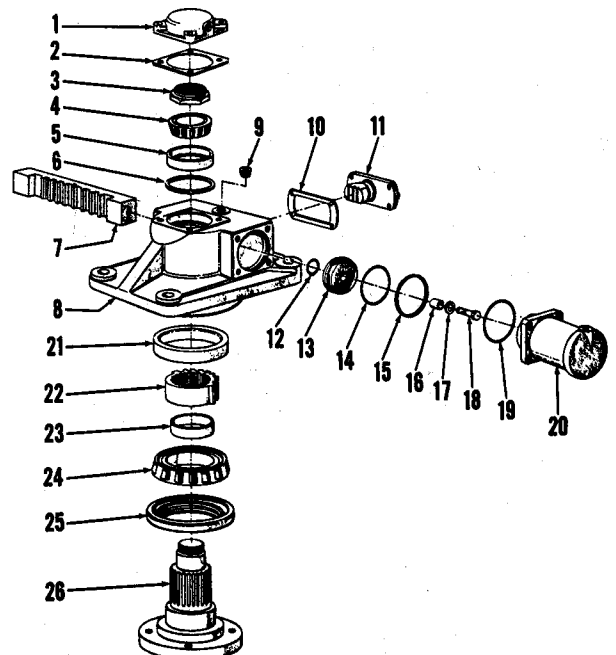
Exploded view of power steering motor assembly. Motor shaft bearings are adjusted by tightening nut (3). Shims (10) control pressure of rack guide (slipper) (11) against front side of rack (7), pinion (22) and steering motor shaft (26).
